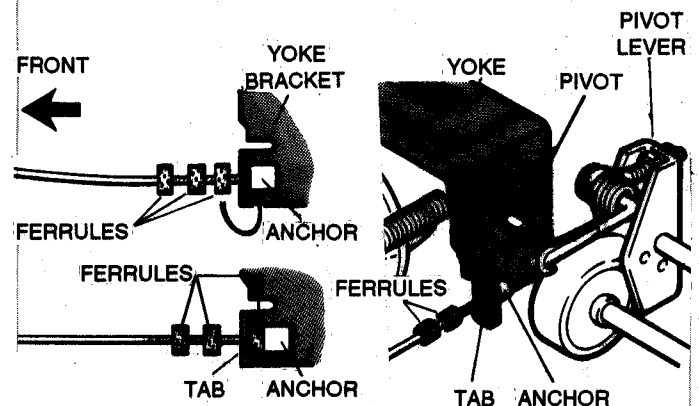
FERRULE RELOCATION (EARLY MODELS)
